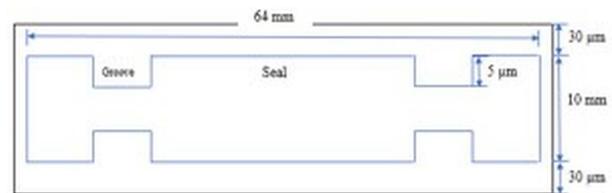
Schematic cross-sectional diagram for bearing with seal design
